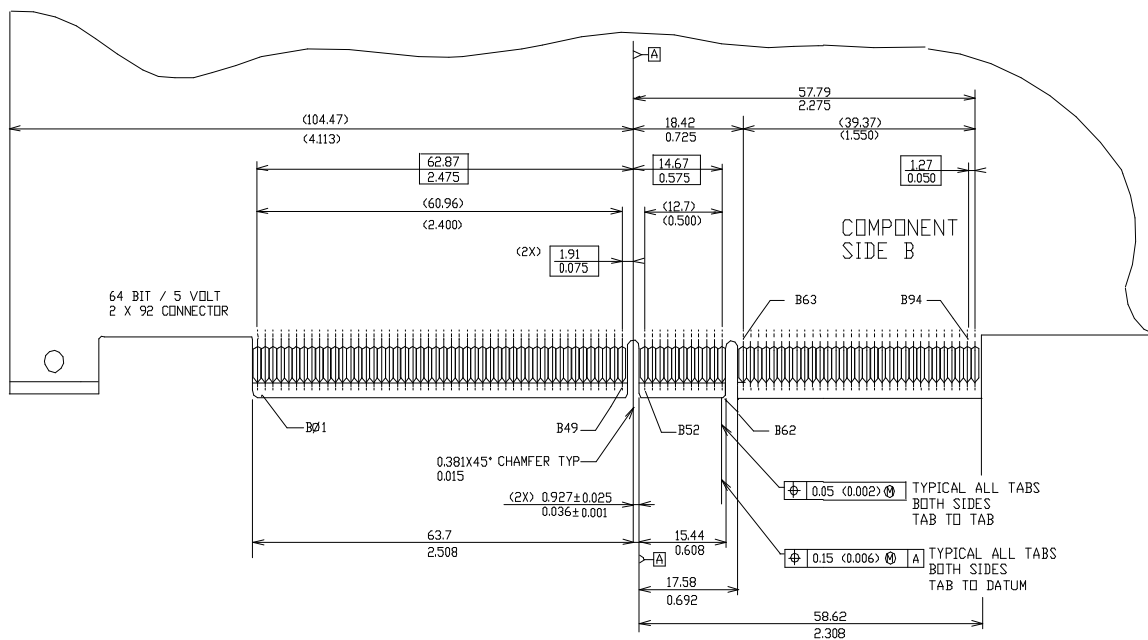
5V/64-bit Card Edge Connector Dimensions and Tolerances
